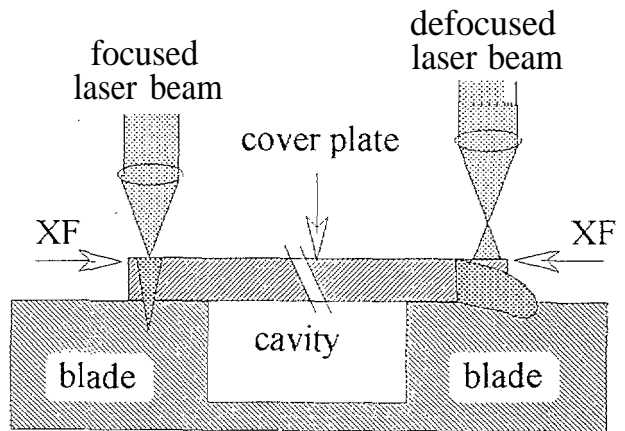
Scheme of deep penetration (left) and of conduction welding (right) of cover plates on blades.
